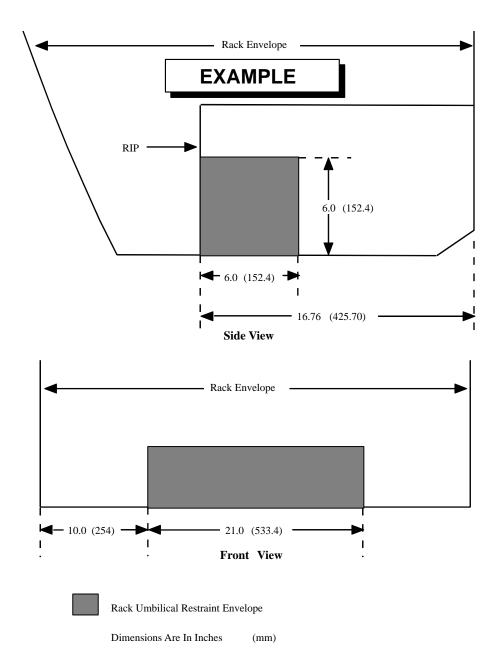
RACK UMBILICAL ROUTING
